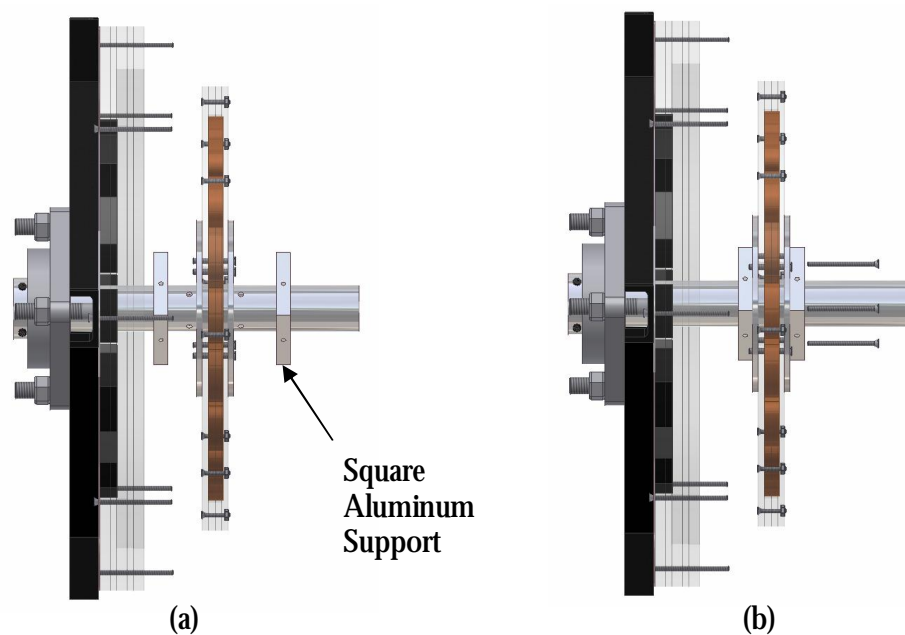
Assembled Square Stator Supports. The square aluminum supports should be fastened to the stator using No. 10-24 screws.
